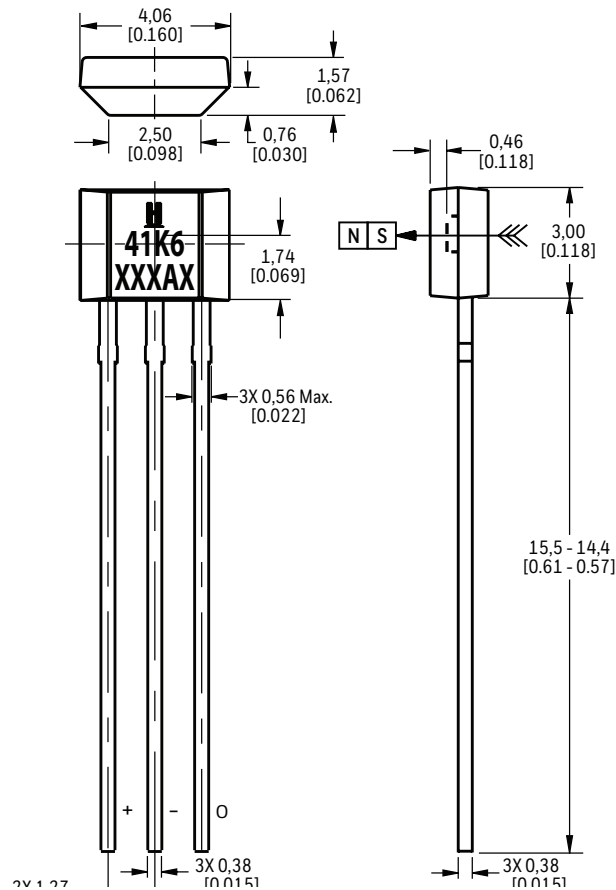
Mounting and Dimensional Drawings (For reference only: mm/[in])
